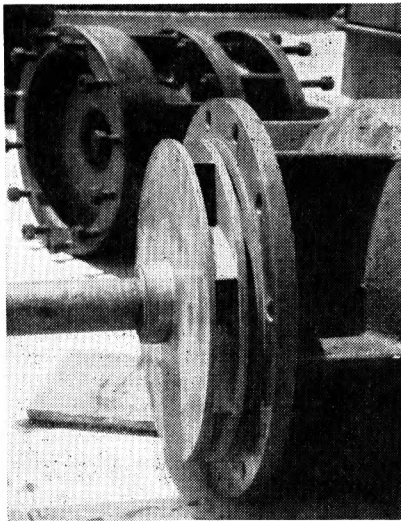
IMPELLER FOR RADIAL-FLOW DEEP-WELL TURBINE PUMP
